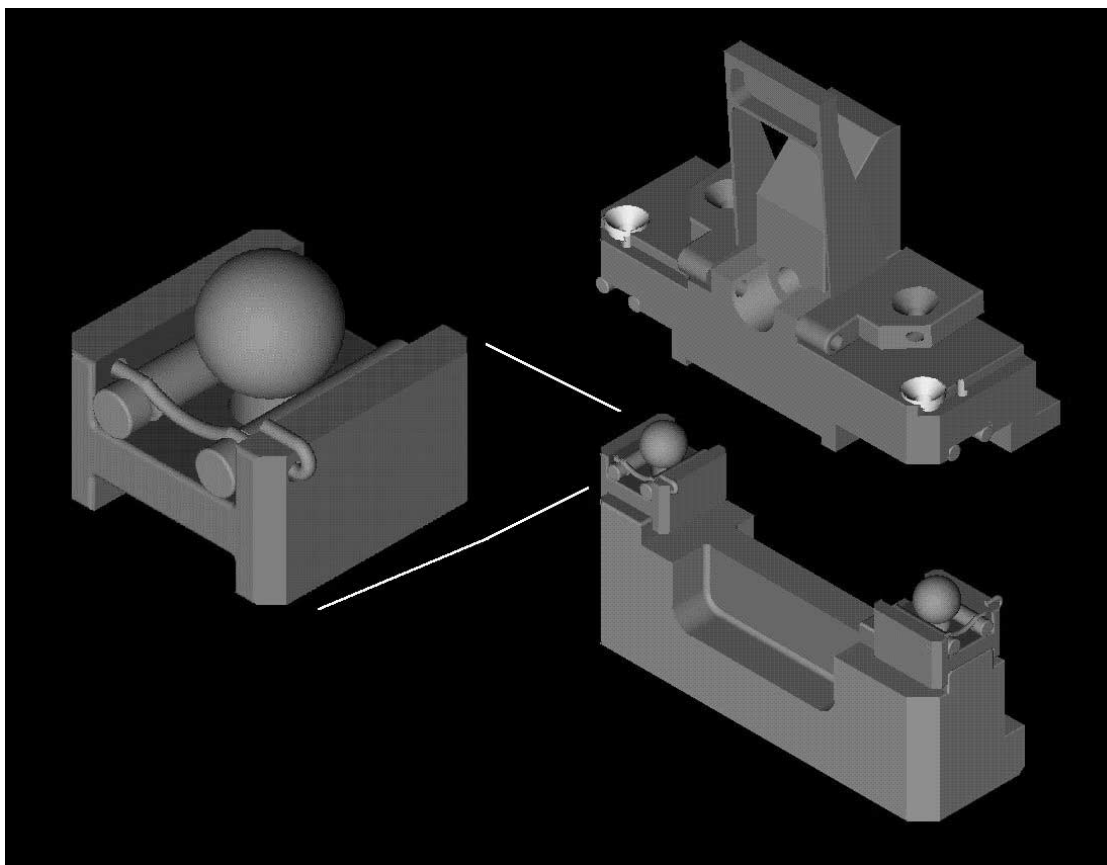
Pro/Engineer exploded view of a Tbar kinematic mount and latch. The bellows have Delrin extension posts, which engage the conical holes in the latch plate and pivot the plate down to disengage the latch hook as they extend.
